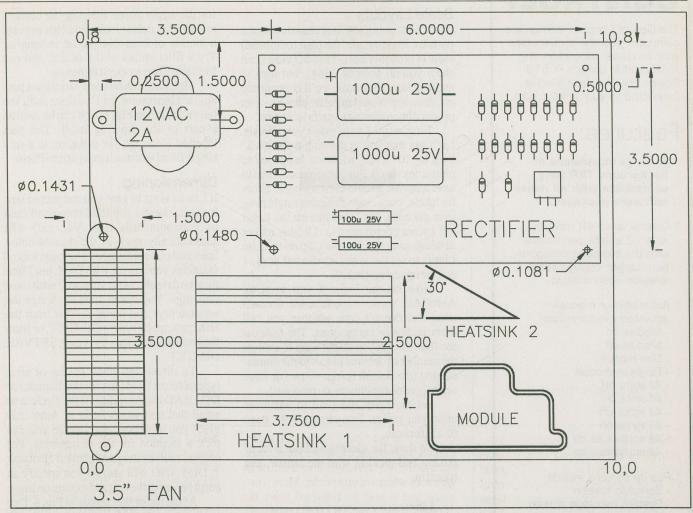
An example of a scale parts layout drawing. Multiple copies are easily inserted with arrays or the Copy command; the DIM function provides automatic dimensioning.
